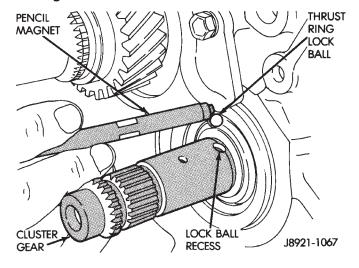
Install Fifth Gear Thrust Ring Lock Ball
